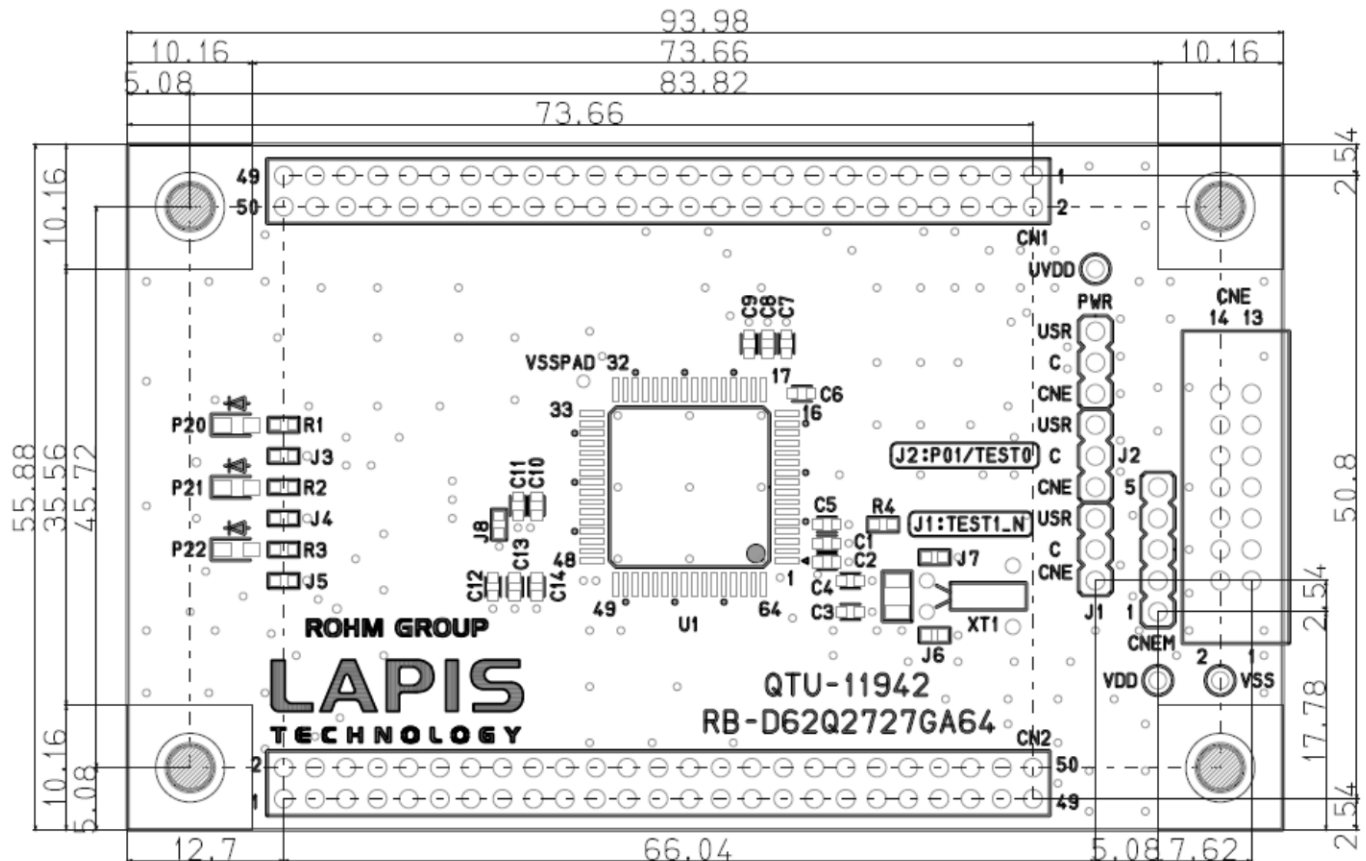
PCB dimensional outline diagram and layout of components (Top view)
